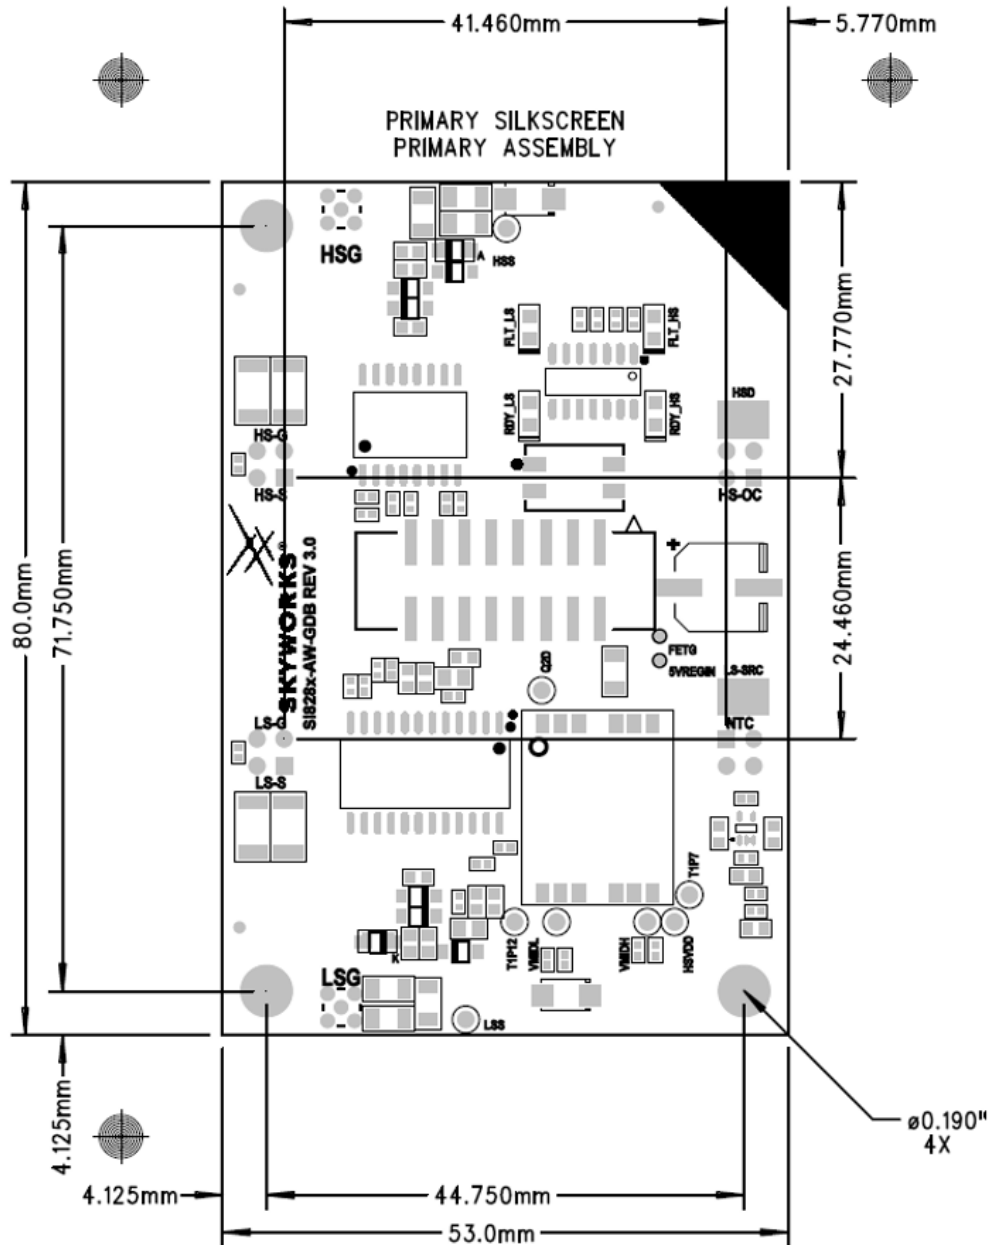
Si828x Gate Driver Board (GDB) Dimensions
